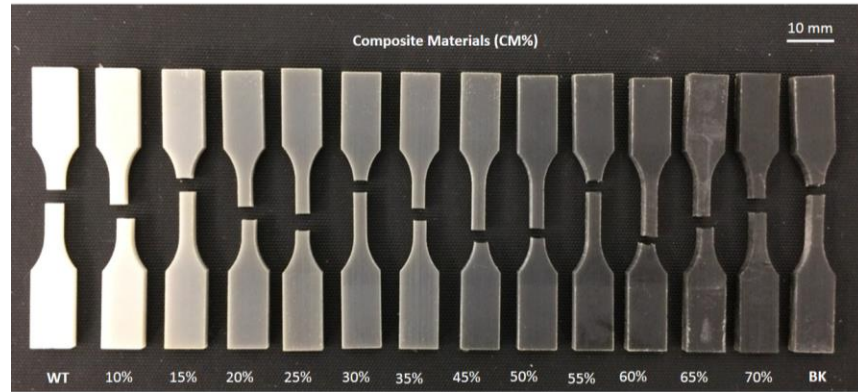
Optical image of the 3D printed base materials after tensile testing to failure.
